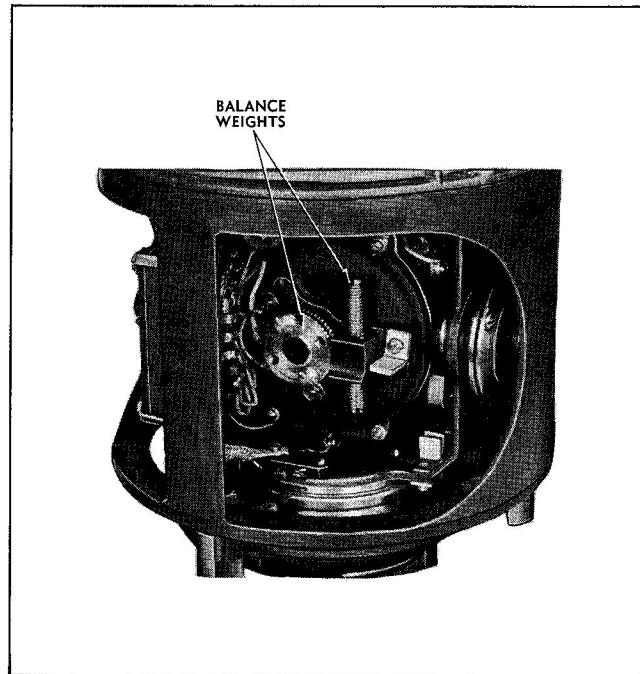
Static Balancing of Gyro Assembly - Gyro Axis Horizontal
